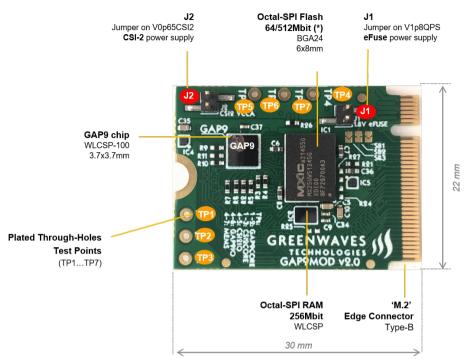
b.2 – GAP9Mod v2.x PCB (Top side)
